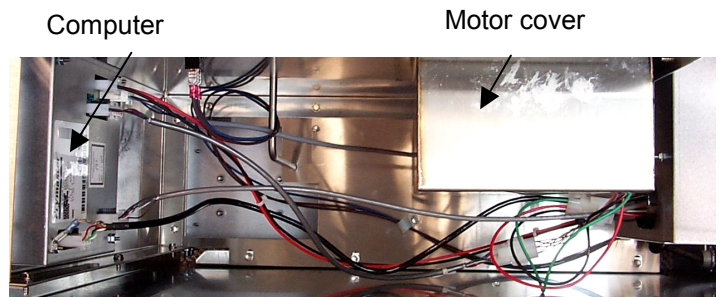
Interior of cabinet showing computer assembly and motor cover.
